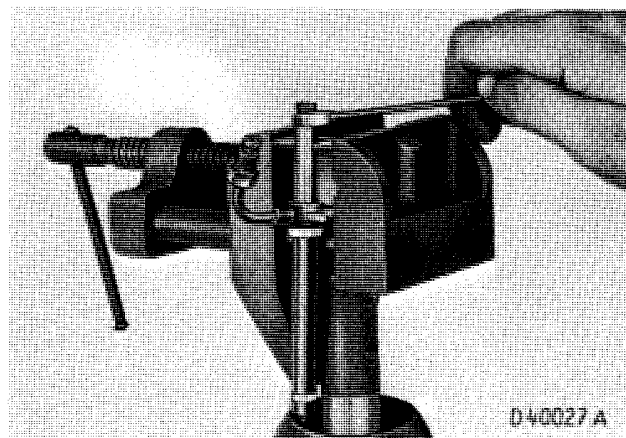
Loosening Lock Nut, Using Holding Fixture
